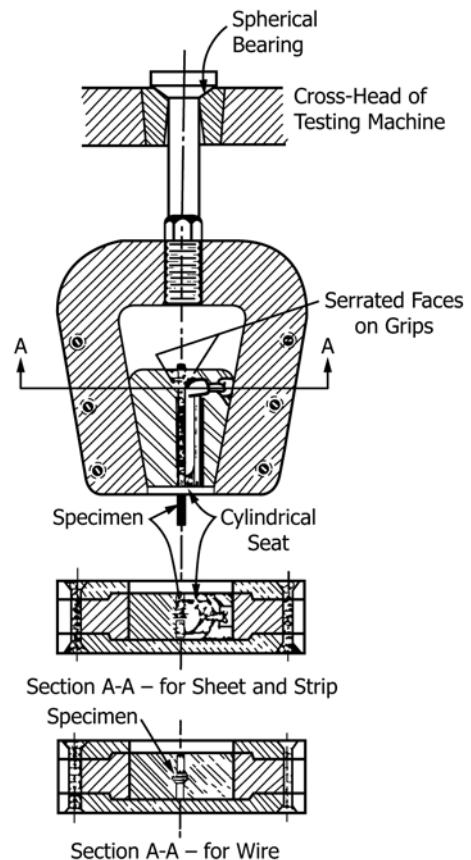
Gripping Devices for Sheet and Wire Specimens
